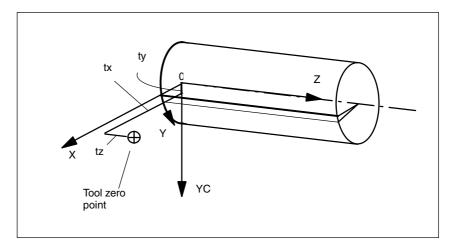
Position of tool zero in relation to machine zero (see Fig. 2-11)
